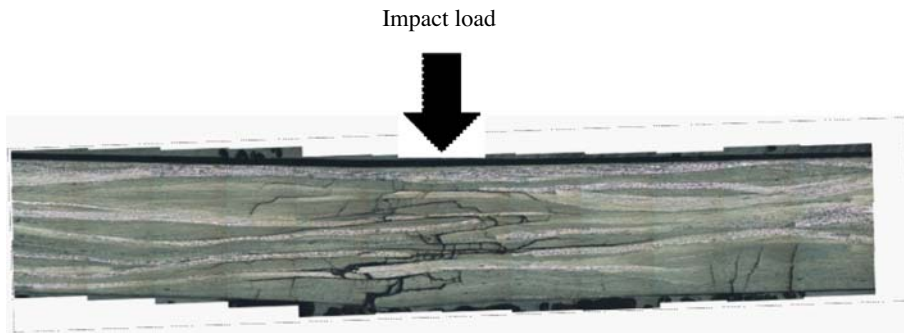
Impact damage observed on the cross section of Specimen No. 10.
